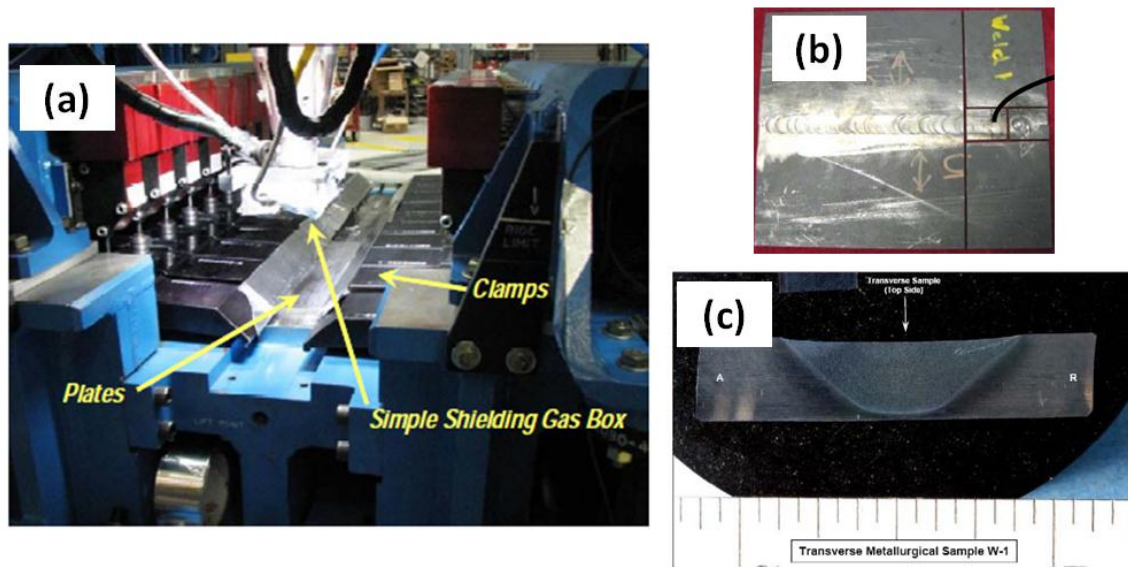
(a) Welding condition for Ti-6-4 butt weld, (b) Ti-6-4 butt welded plate made by FSW, and (c) weld cross section macrograph of (b)
